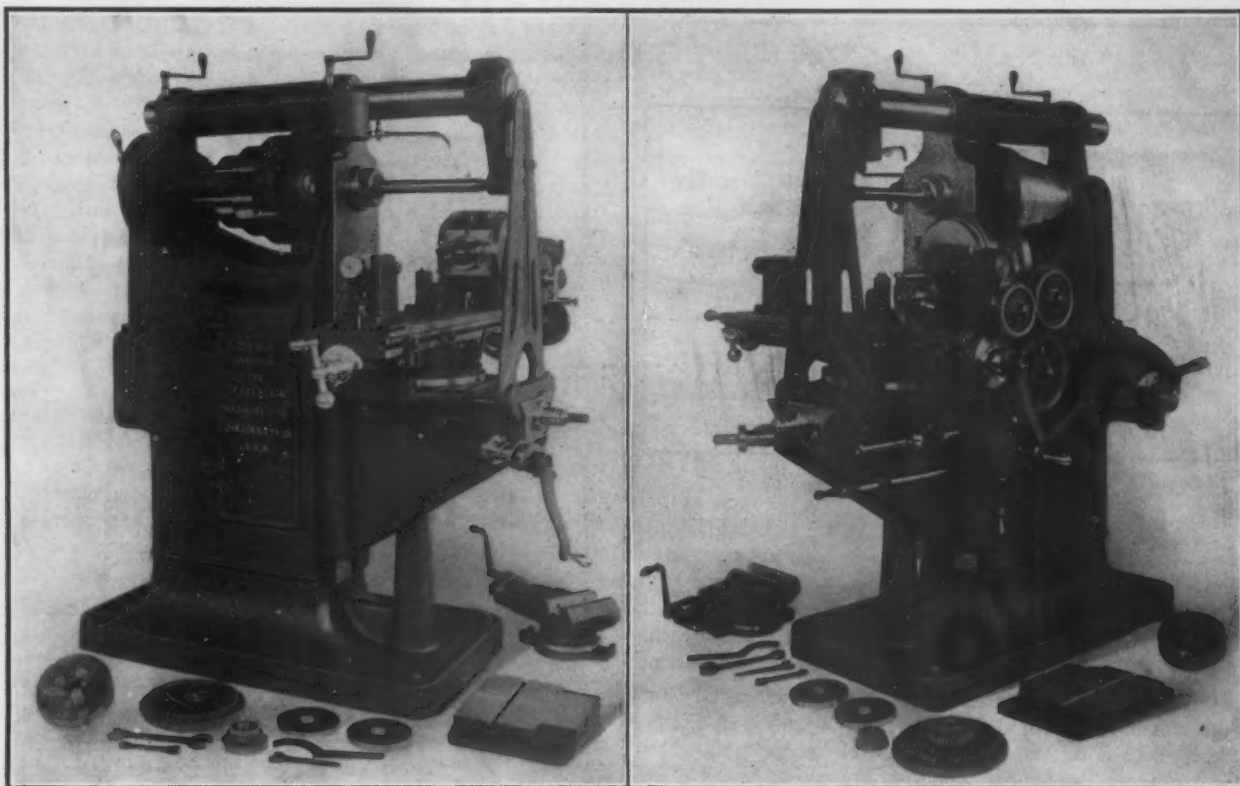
Two Views of a New Model of the No. 25 Universal Milling Machine, Built by the Oesterlein Machine Company, Cincinnati, Ohio.
